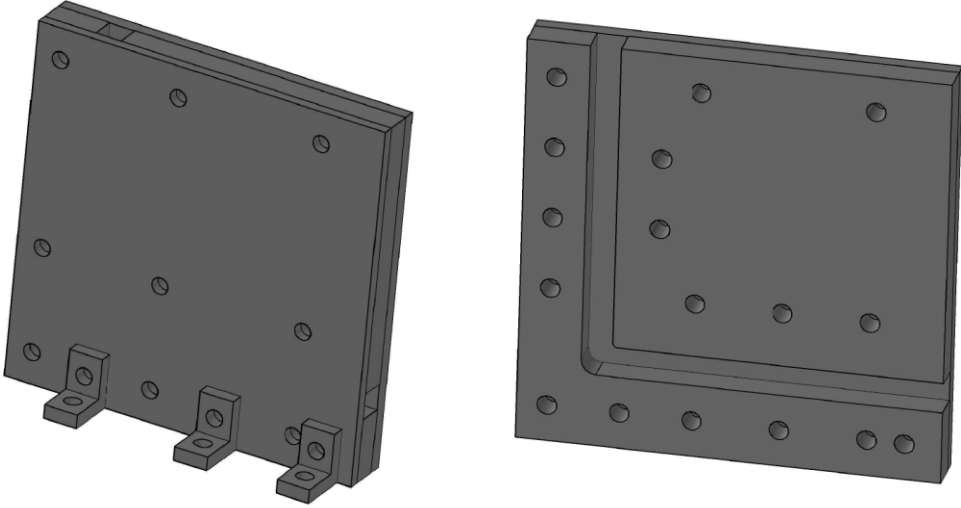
Three-dimensional drawings of the designed billet ECAP setup.
